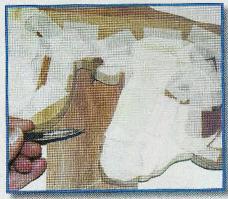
Lay the assembly on the 1/2"-thick wood for the neck and trace a cut line.
